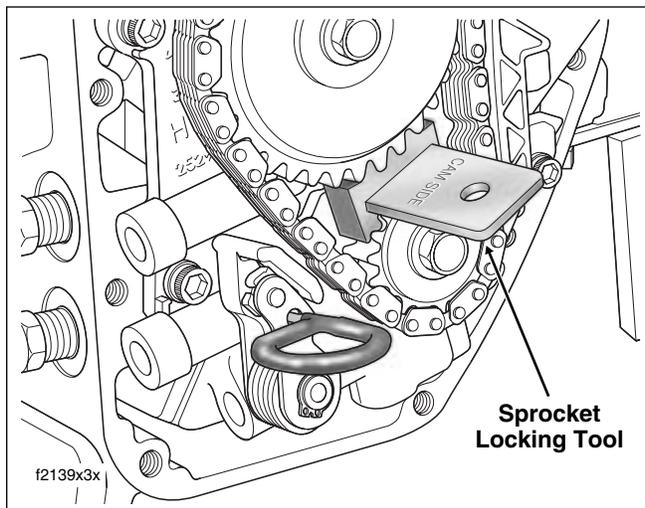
Lock Crank and Primary Cam Sprockets Before Tightening Flange Bolts
